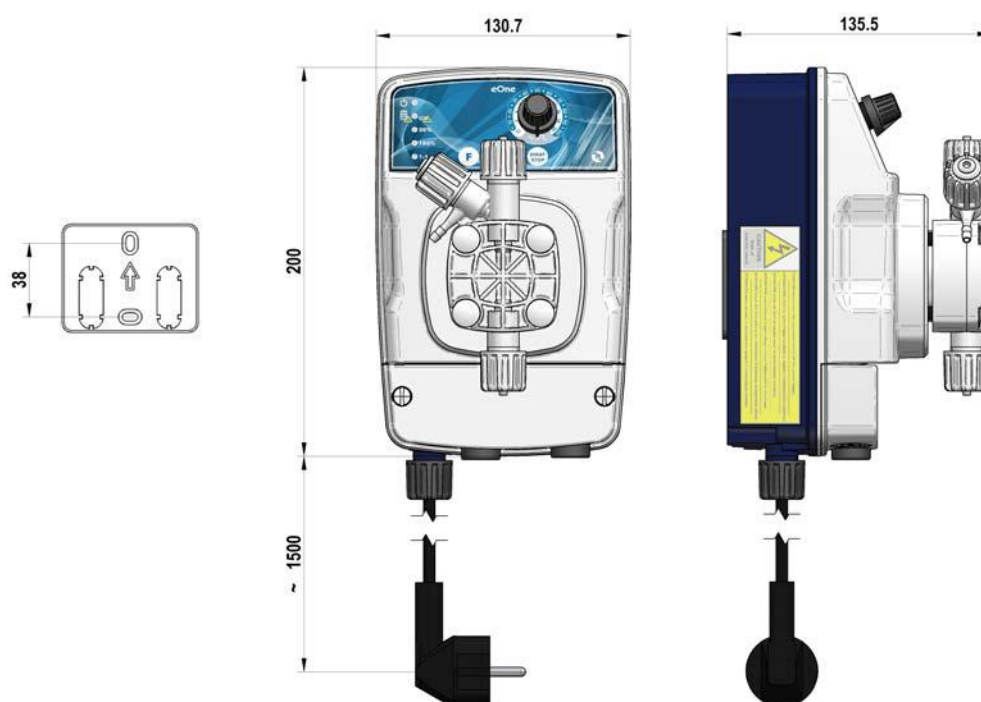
Dimensions in mm. Plate for wall mounting.
